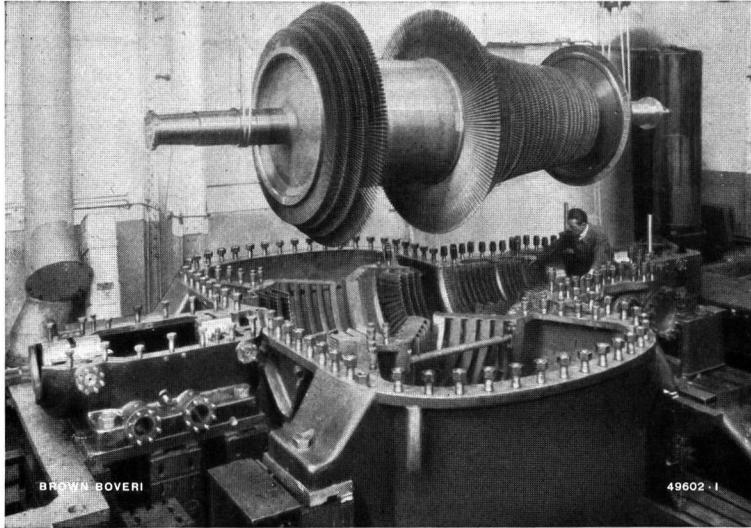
Lower part of cylinder with rotor suspended above it of a 34,000-kW, 3000 r. p. m. single-cylinder turbine with double low-pressure blading. Built in 1939.
